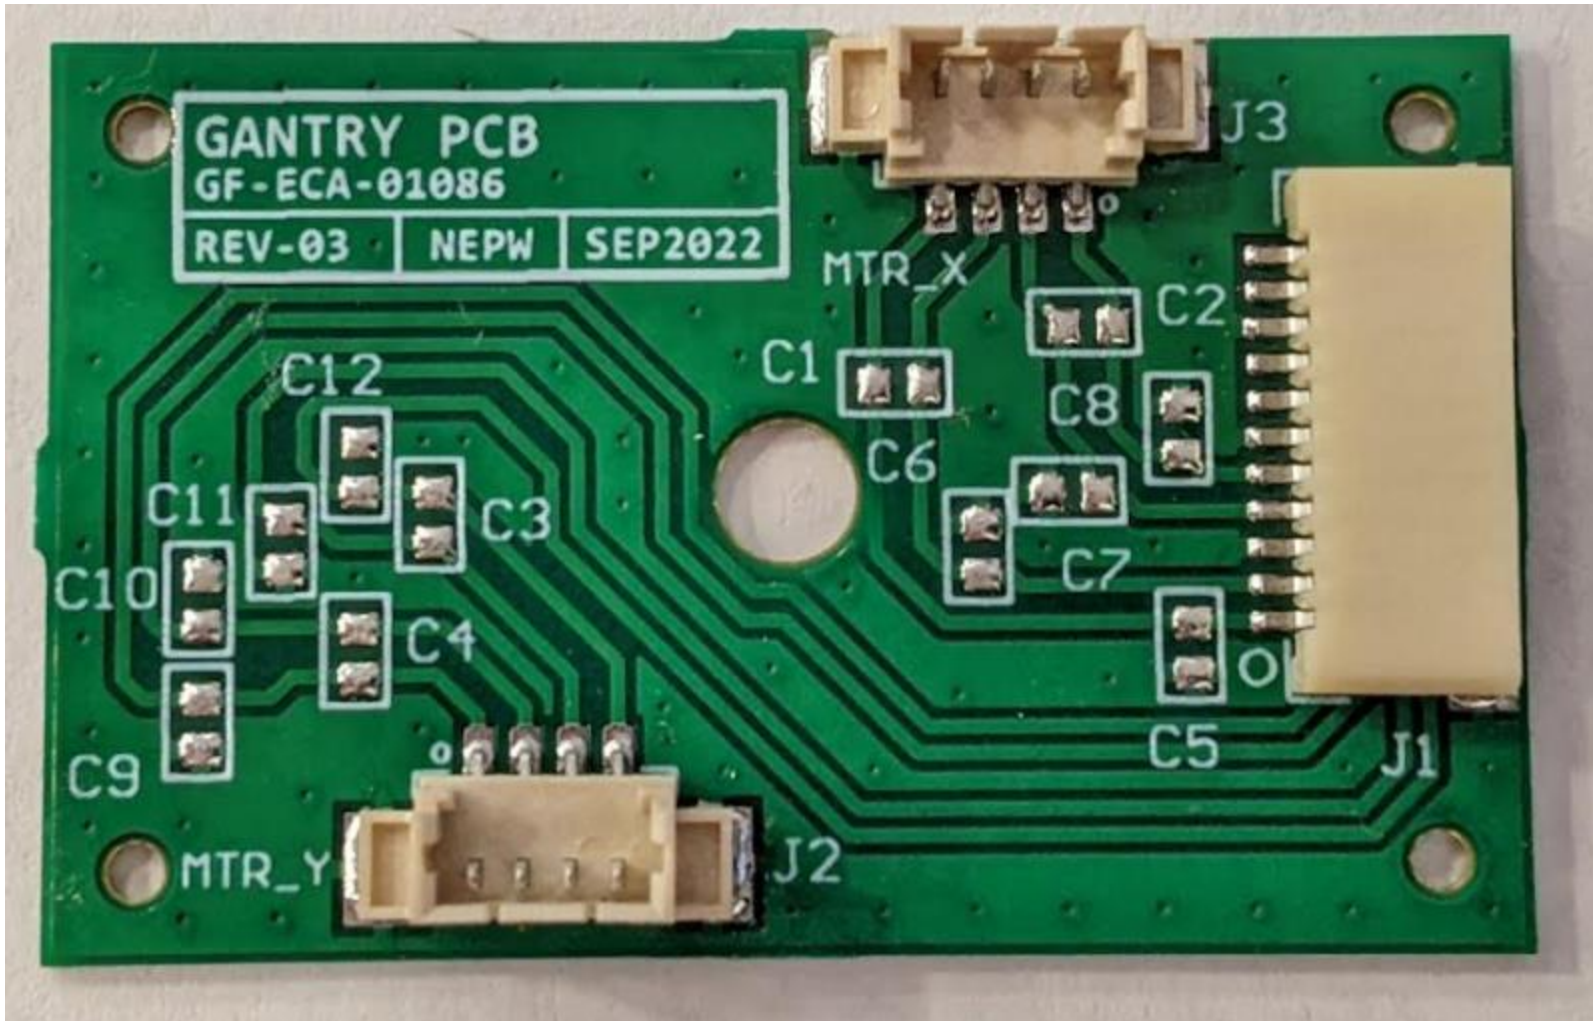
GF-PCA-00158- Gantry PCBA- Top Side
